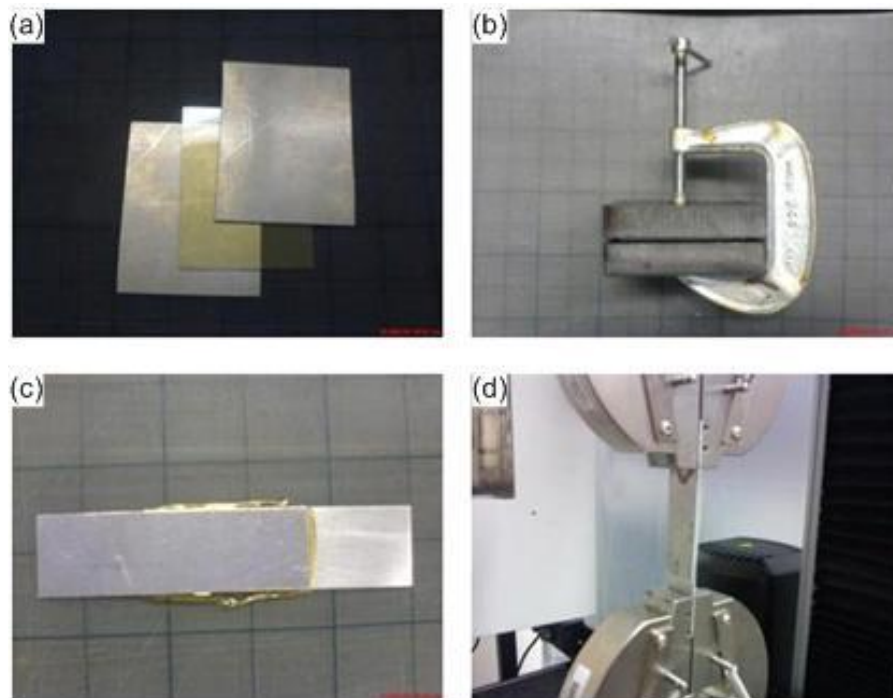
(a) Place Al plate-polymer sheet-Al plate order. (b) Clamp the sandwich panel. (c) Bake the panel for 20min in 500°F. (d) With the scrap filed off, the panel went to the tensile test machine.
